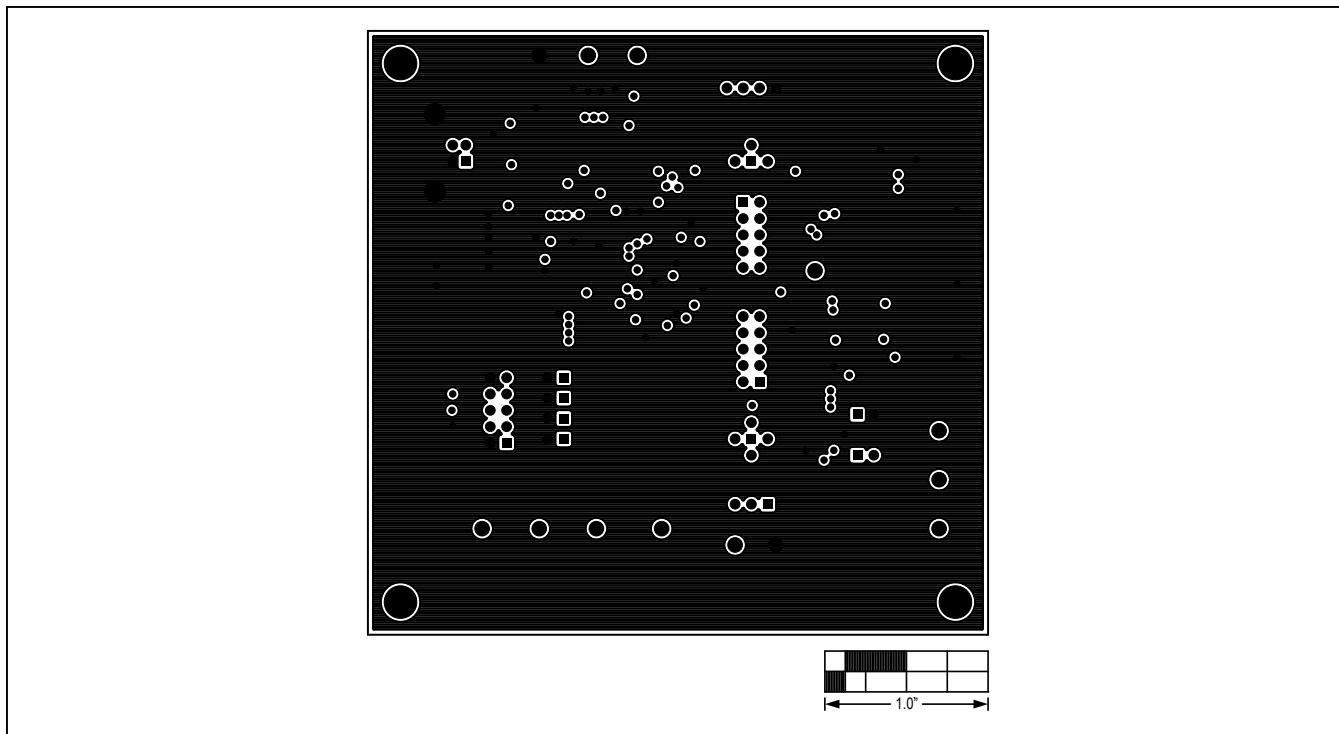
MAX5395L EV Kit PCB Layout—Inner Layer 2
